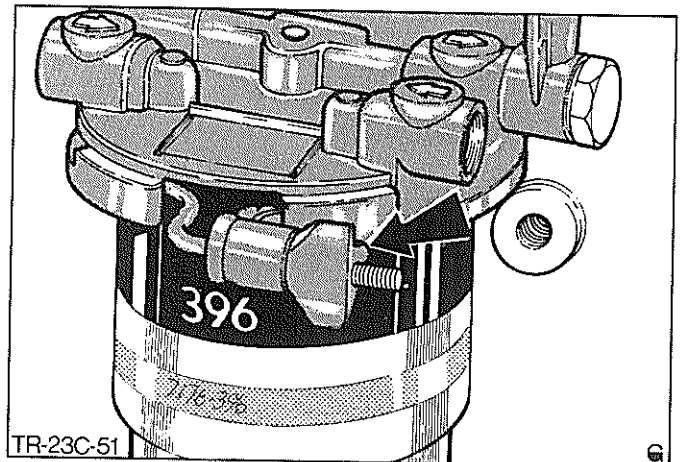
Slacken fuel filter band clamp securing wing nut fully before removing filter element.
